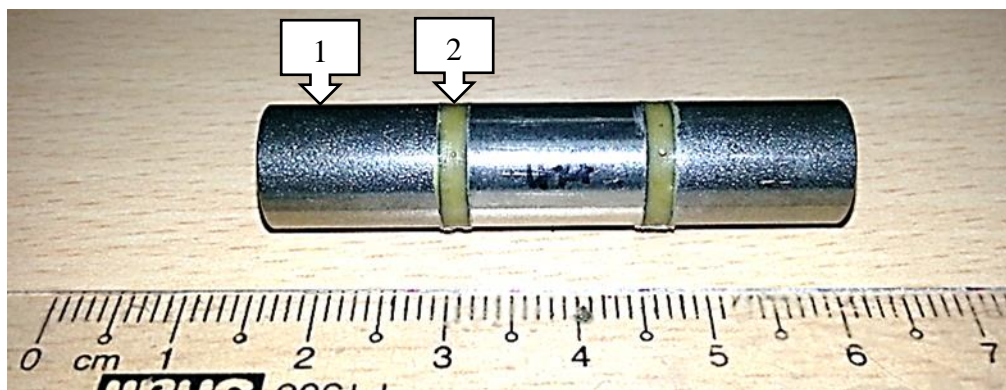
A double bonded shear test piece. 1: stainless steel; 2: rubber.
